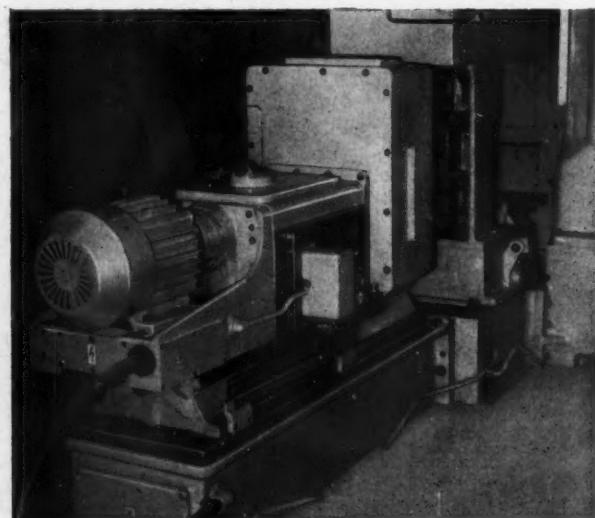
Close-up view of one of the unit heads on the type UT 061, 3-way drilling machine in the heading illustration, for operations on engine crank-case castings. The machine has a total of 89 spindles and operates on a 4-min. cycle
